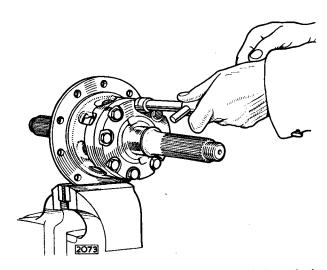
Tightening the differential casing bolts with the output shaft in position.
